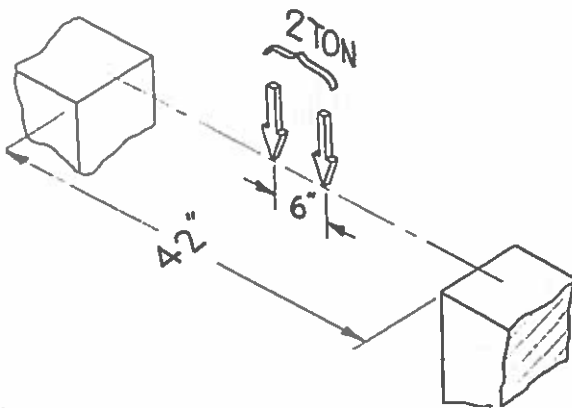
SECOND YEAR PROBLEMS: *Folded sheet-metal construction, using steel sheet joined with spot-welds. Loads shown are collapse loads.
